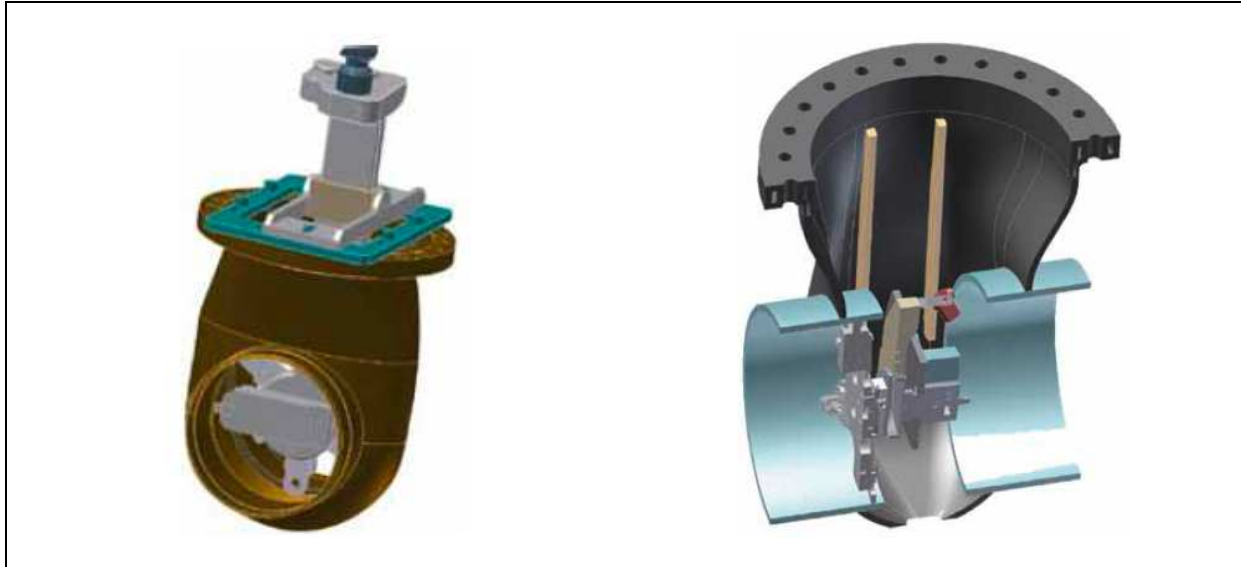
AVARIS turning (left) and welding solution (right).
